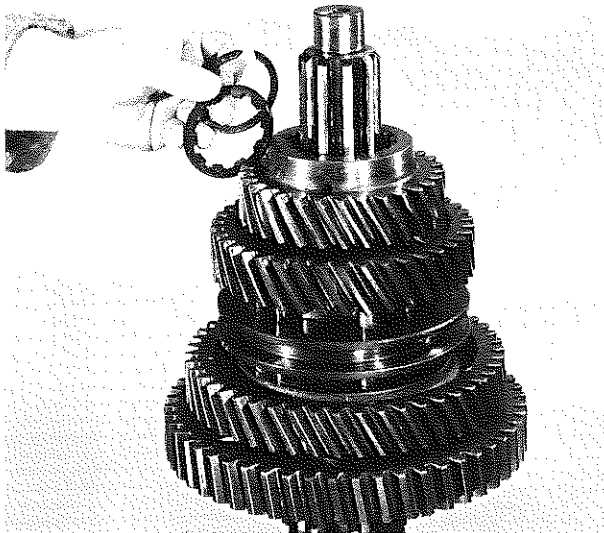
4th Speed Gear Thrust Washer and Snap Ring
